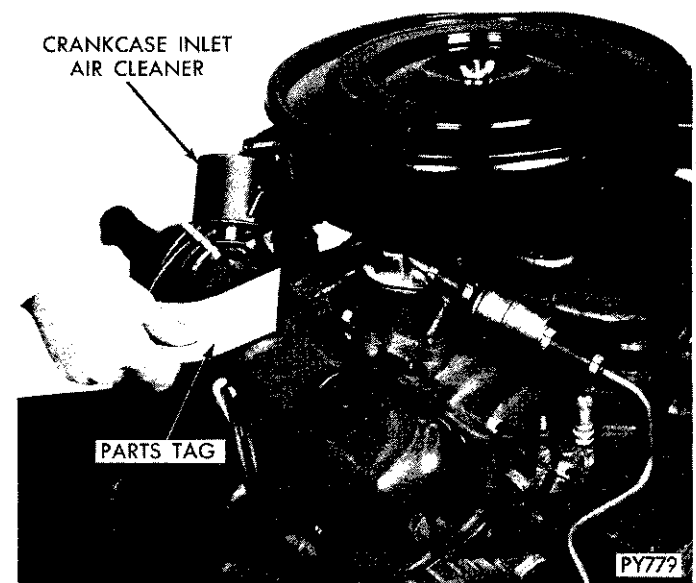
Checking Vacuum at Crankcase Inlet Air Cleaner Opening
